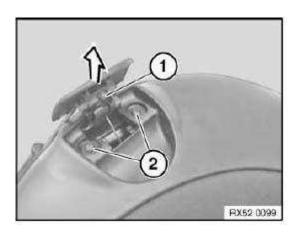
Removing Release Handle Courtesy of BMW OF NORTH AMERICA, INC.
